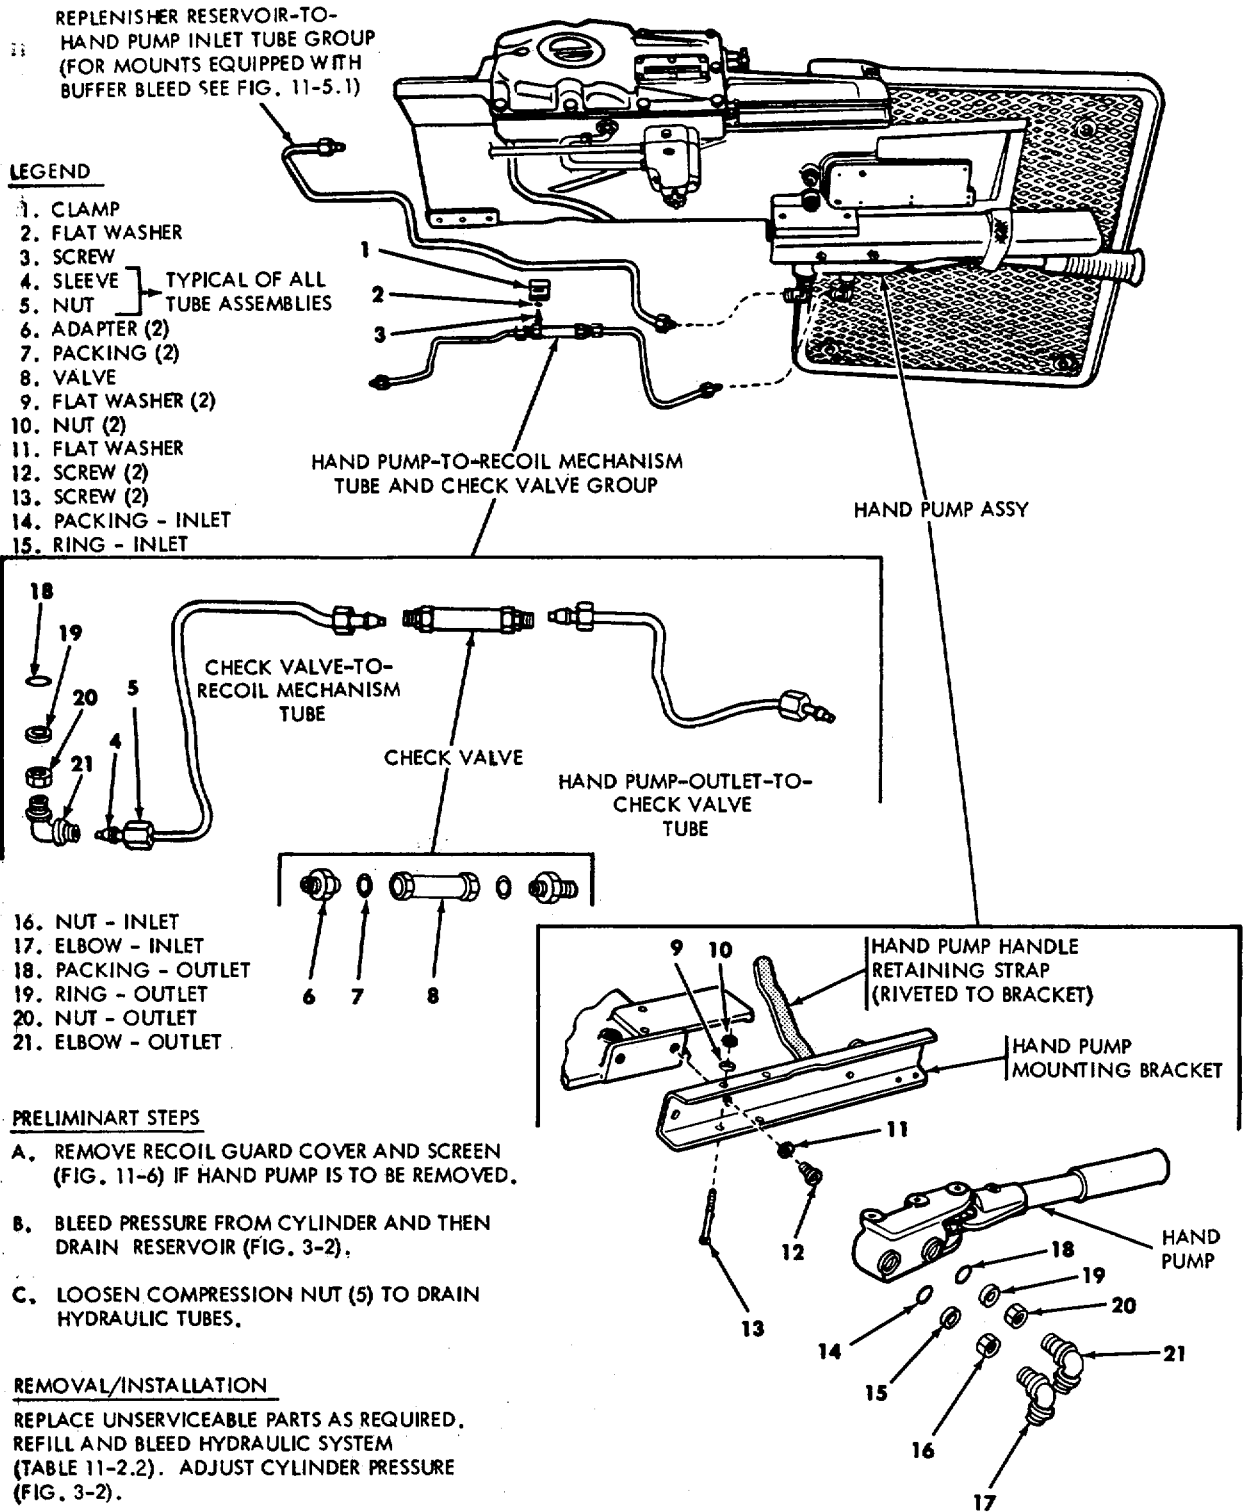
Removal/Installation-7.62mm machine gun mount
